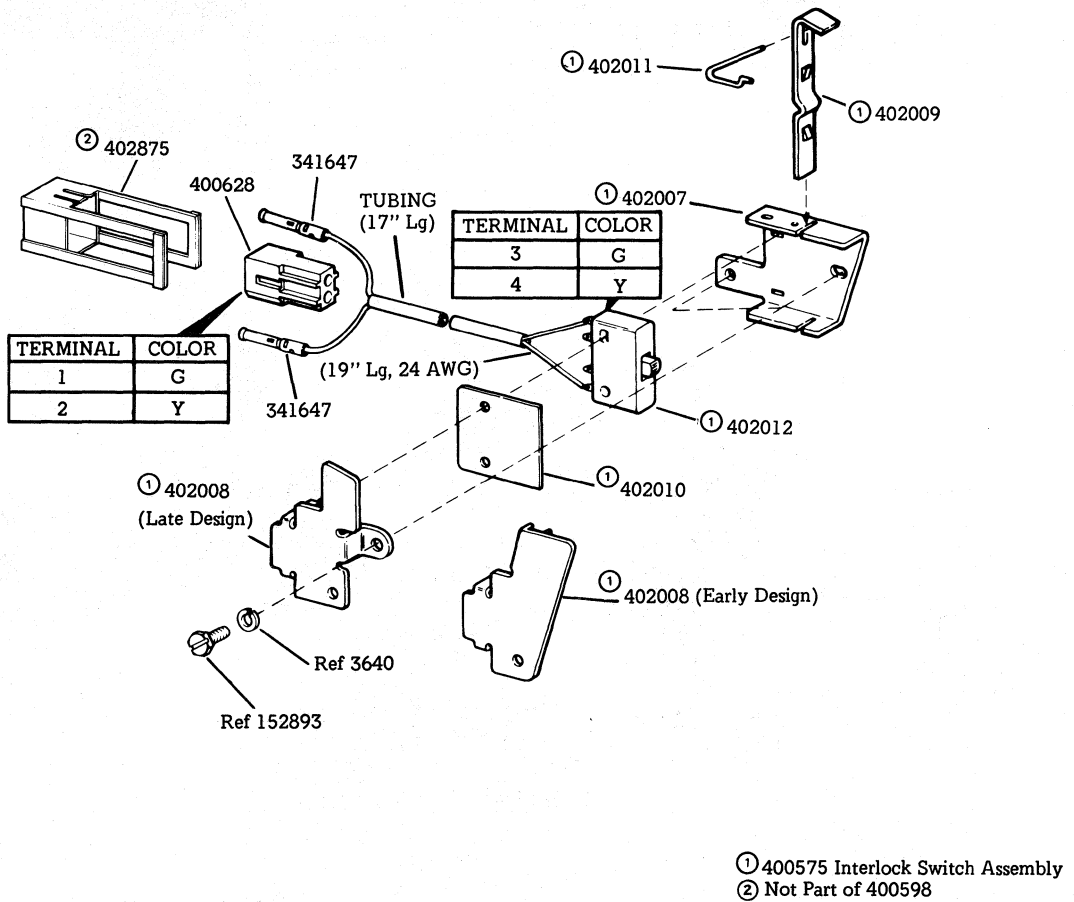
Interlock Cable Assembly for Friction Feed Printer Cabinet
